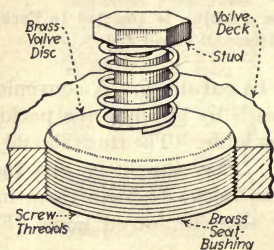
Bronze Pump-Valve Flat-Disk Type.
